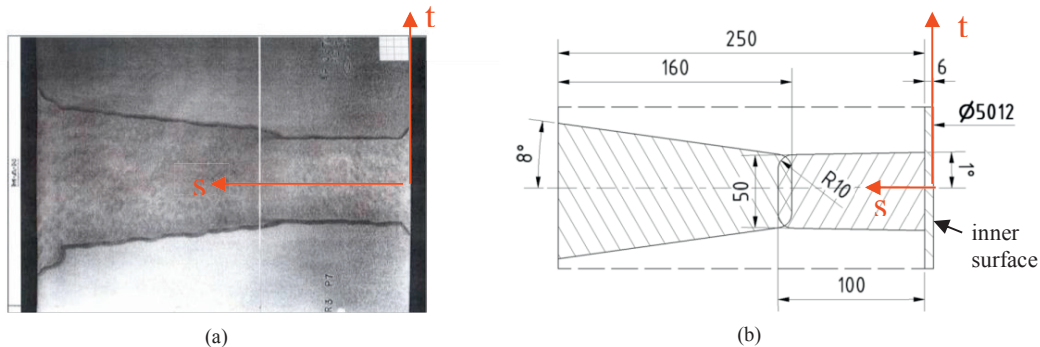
Macrograph (a) and dimensions of the weld (b)
